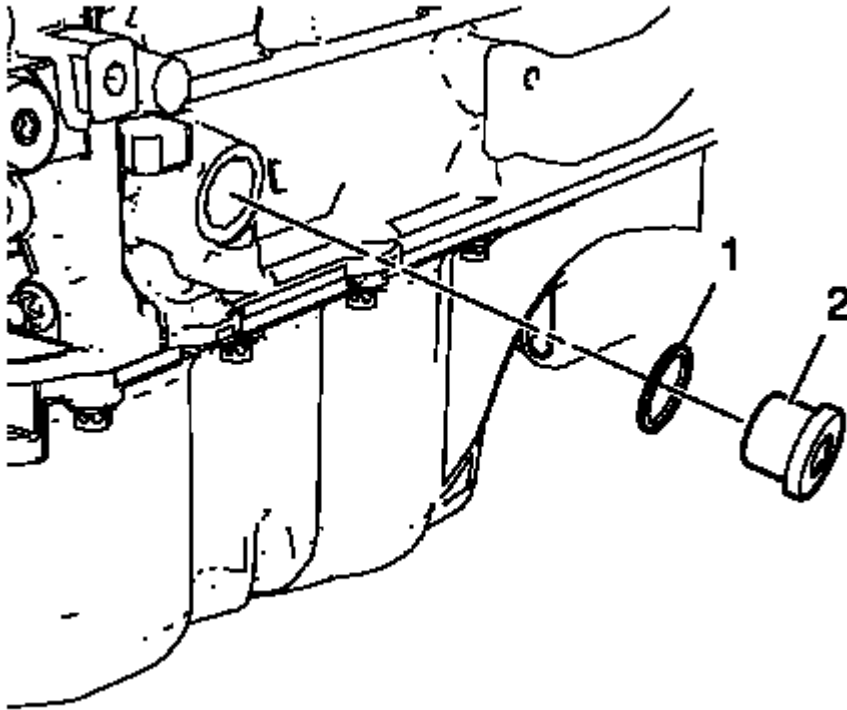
Bore And MarkCourtesy of GENERAL MOTORS COMPANY
